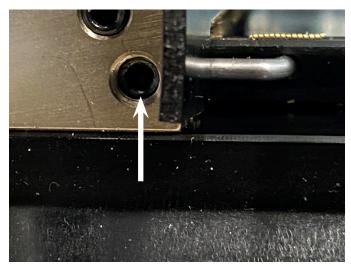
The Y-axis (mill) and Z-axis (chucker lathe) gib set screw access hole on the mill and chucker lathe saddles.
